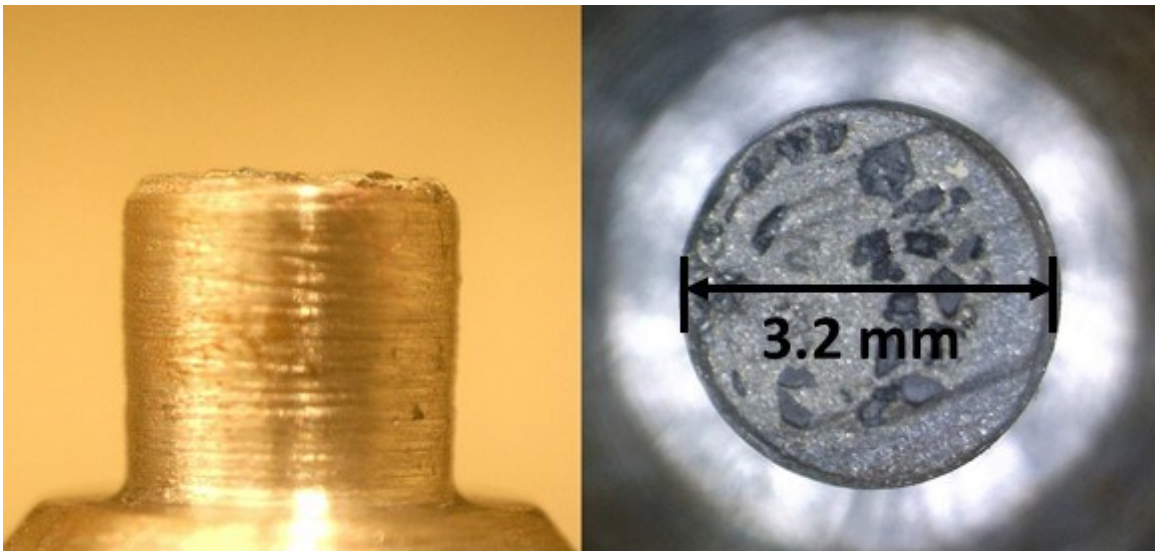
3.2 mm wide cylindrical grit dressing tool used for grooving
